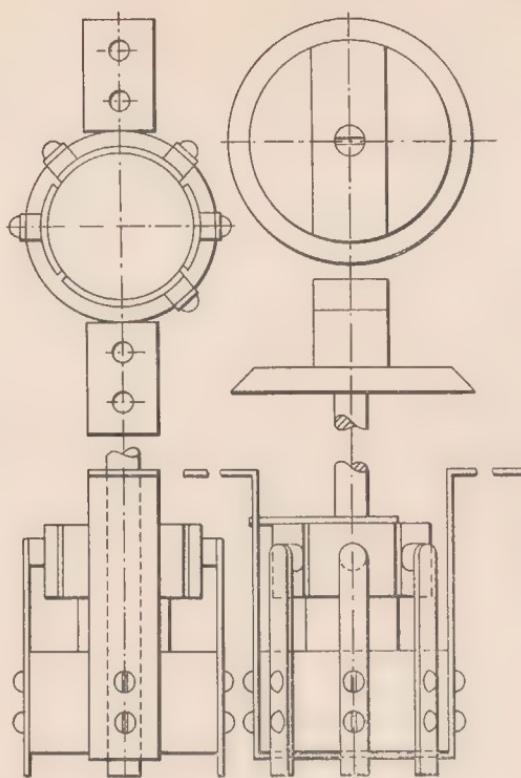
Elevations and Plans of Series-parallel Switch for the Aerial Condenser.
